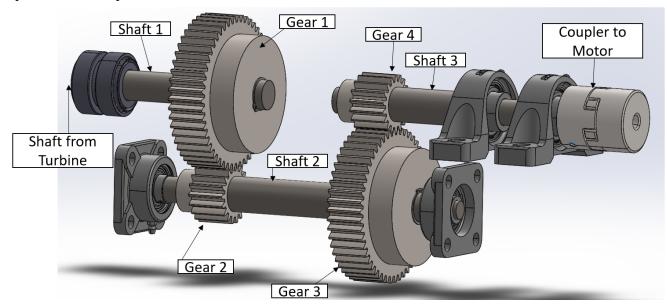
Completed and Labeled Gear Train Assembly for Wind Turbine
